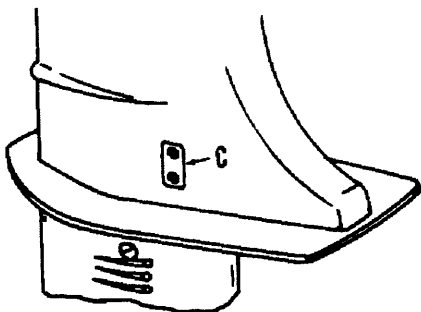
Remove inspection cover (C) for access to shift linkage screw.
